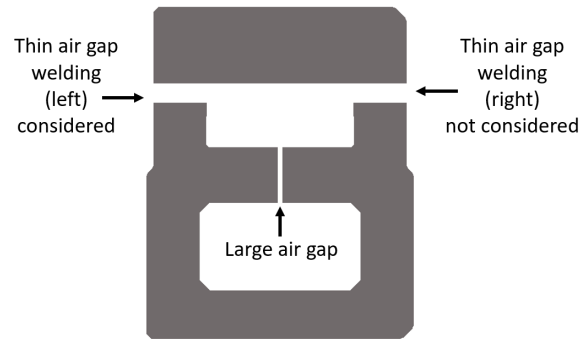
NSX current transformer before welding to insert the secondary coil.
